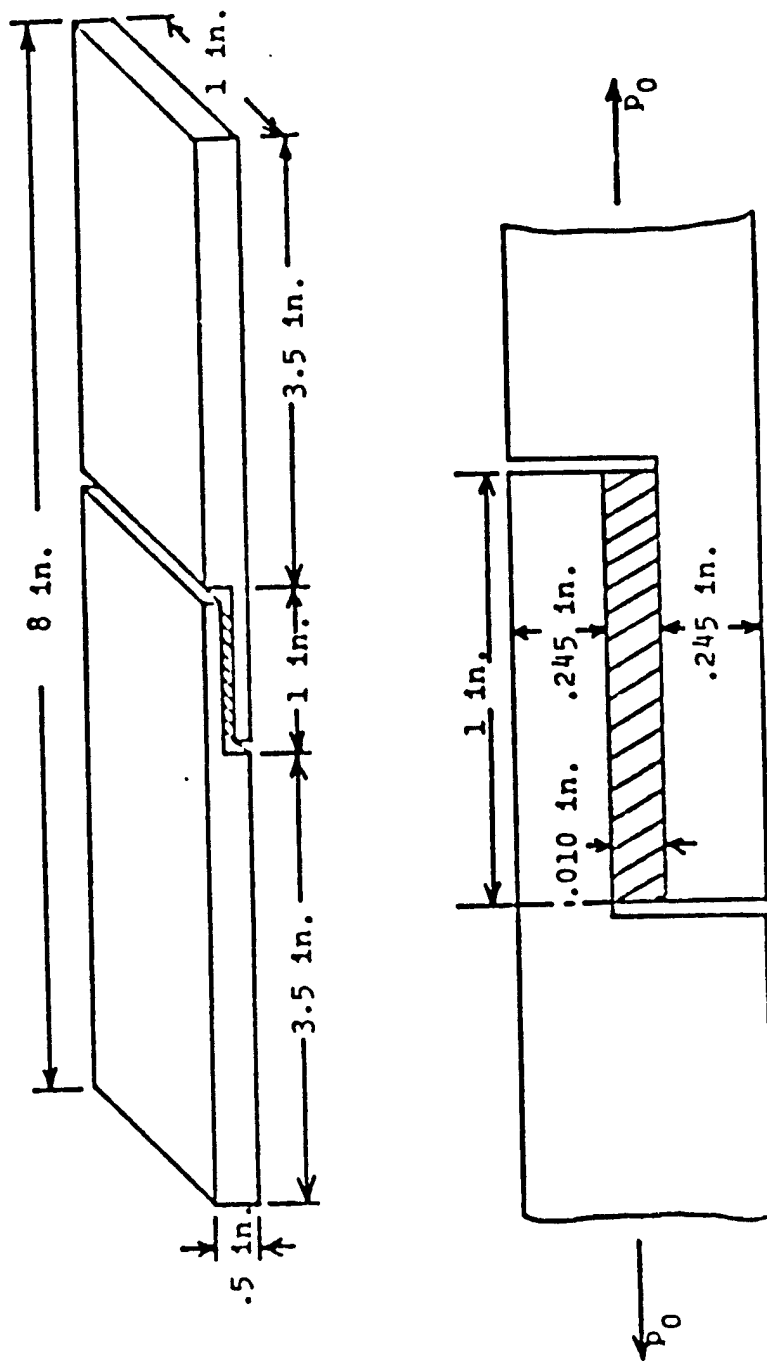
Step-Lap Joint Test Specimen (SI conversion: 1 in. = 25.4 mm)
